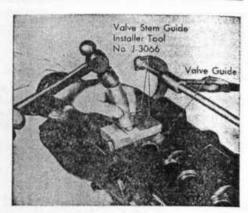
Showing special tool used to control position of valve guides when driven Into 1949-54 engines
